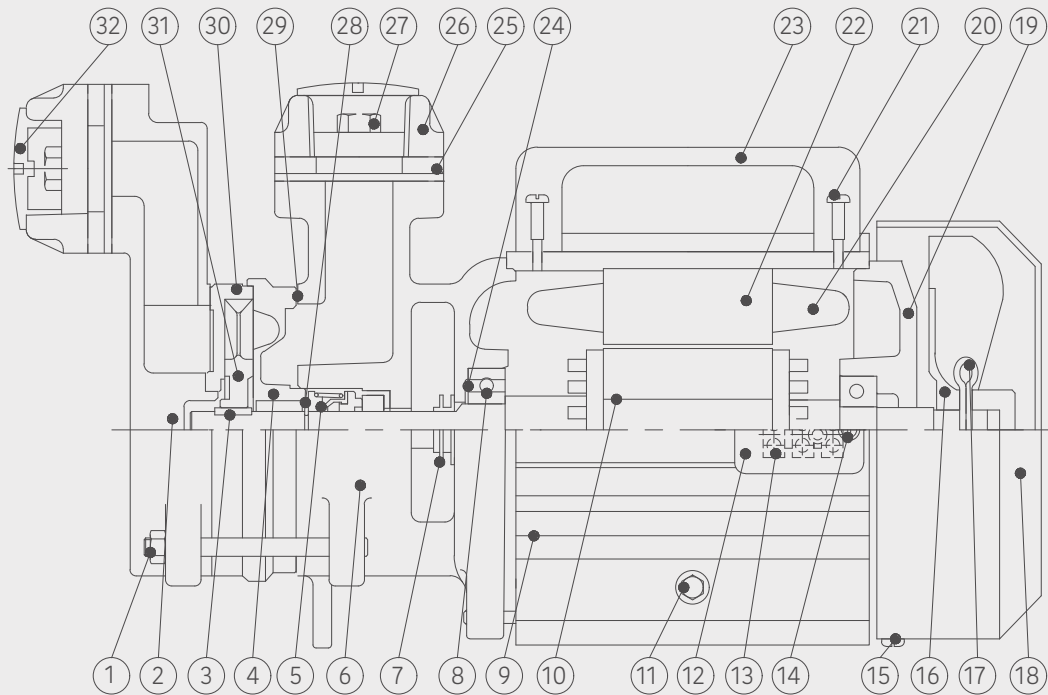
Cross-section view of 1Ø high speed self-priming monoblock – TMM / TSH
